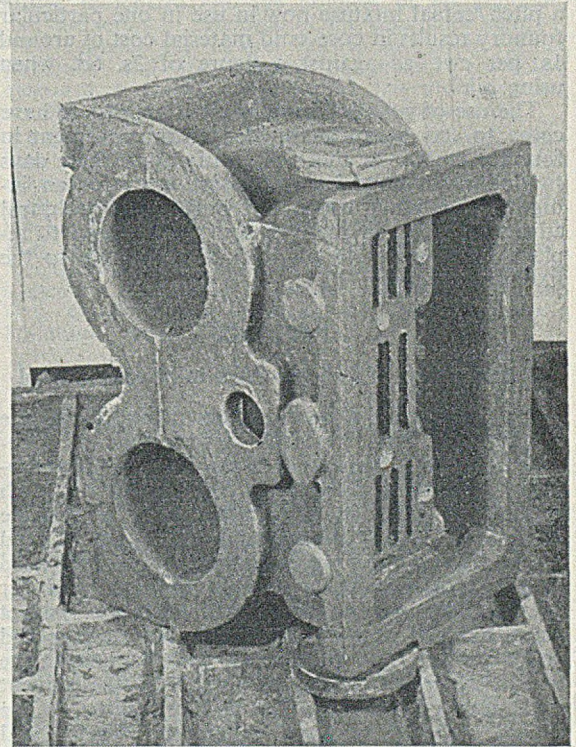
Steam Cylinder Casting produced by the Core-assembly Technique, using Pelleted Pitch in the Cores (casting weight $5\frac{1}{2}$ cwt.).
